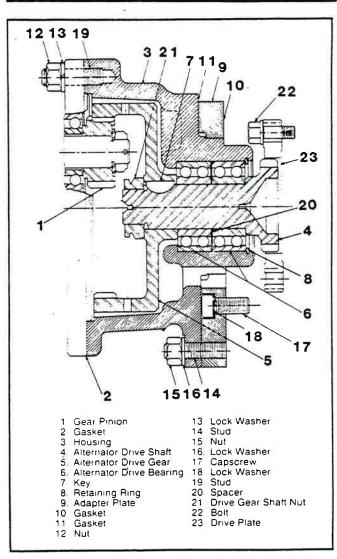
Gear-Driven Alternator Drive Adapter (Cross Section).
